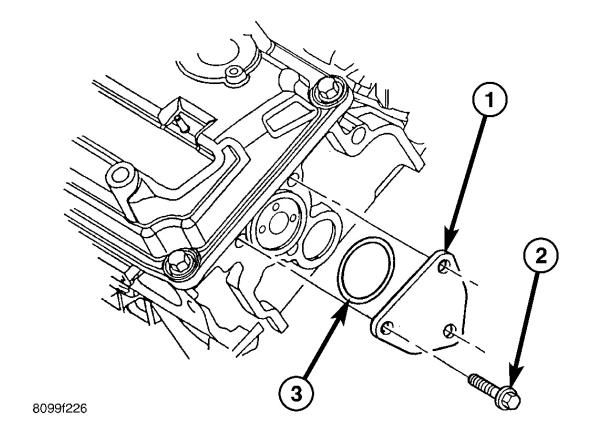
Camshaft Thrust Plate Courtesy of CHRYSLER LLC
